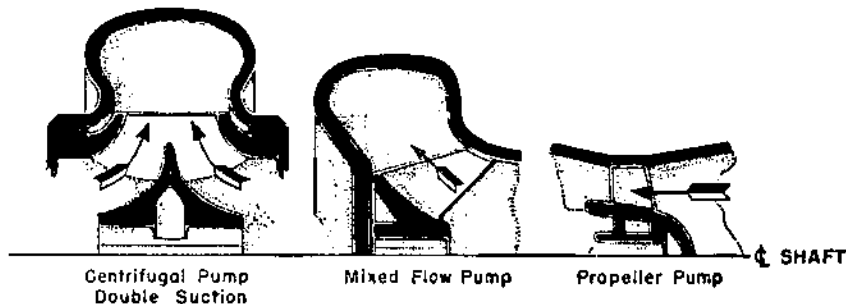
Sketch of pumps used for drainage. [Courtesy of Hydraulic Institute, New York City.]
